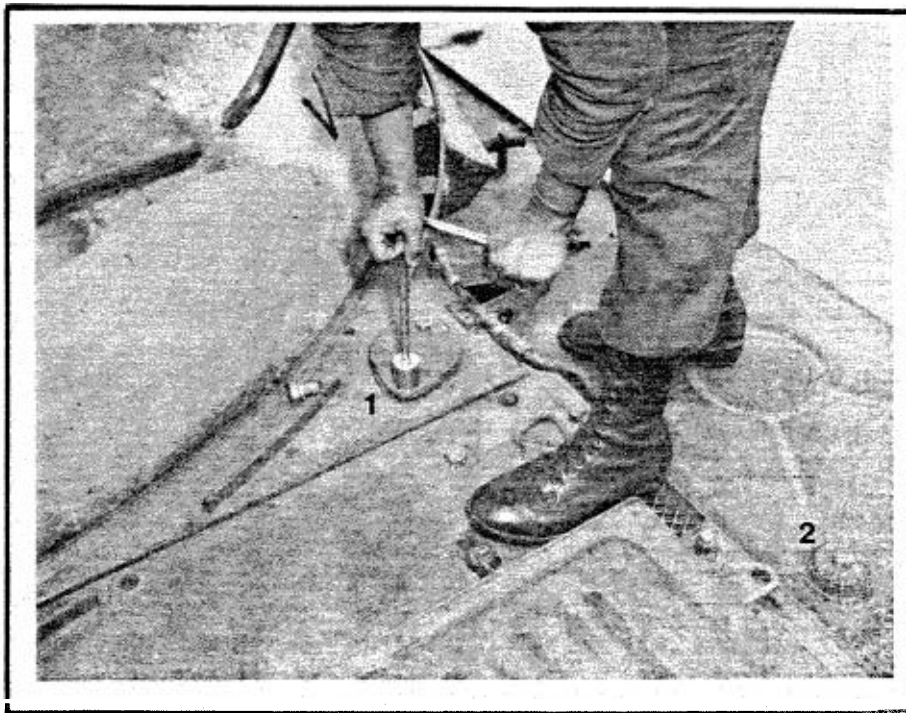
REAR FUEL TANK ACCESS PLATES (HONEYCOMB) (1)
